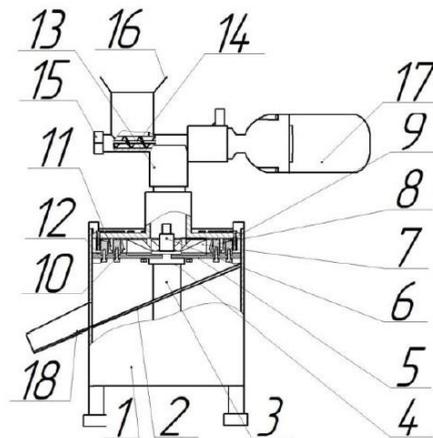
Schematic diagram of a rotary - centrifugal grain shredder: 1 - body, 2 - inclined bottom, 3 - bearing assembly, 4 - drive shaft, 5 - rotor, 6 - nut - cutter, 7 - distributor, 8 - ring protrusions, 9 - ring protrusions, 10 - knives, 11 - knives, 12 - outer row of knives, 13 - dispenser housing, 14 - screw, 15 - plug, 16 - loading hopper, 17 - screw dispenser electric motor, 18 - upload window.
